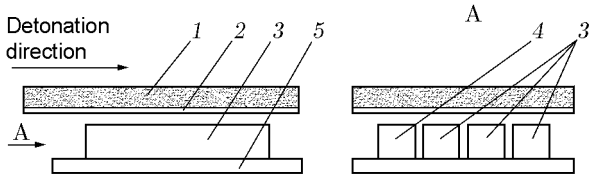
Welding a copper plate to steel samples of different hardness: (1) explosive charge; (2) copper plate; (3) steel samples; (4) aluminum sample; (5) base.
